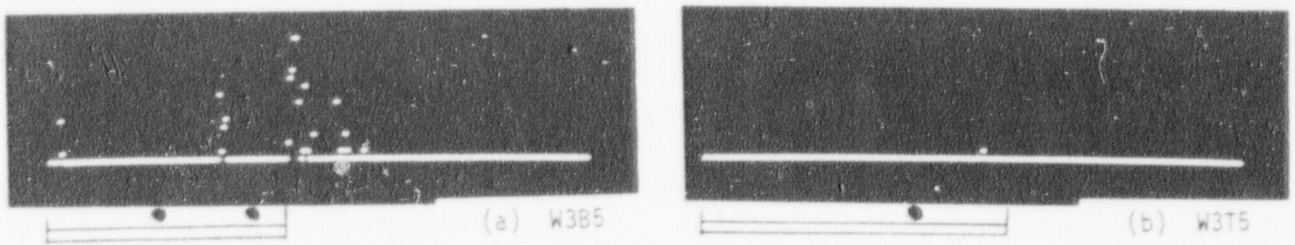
DETECTION OF 2.0" CRACKS DURING SUBMERGED ARC WELDING OF A533B PRESSURE VESSEL STEEL
